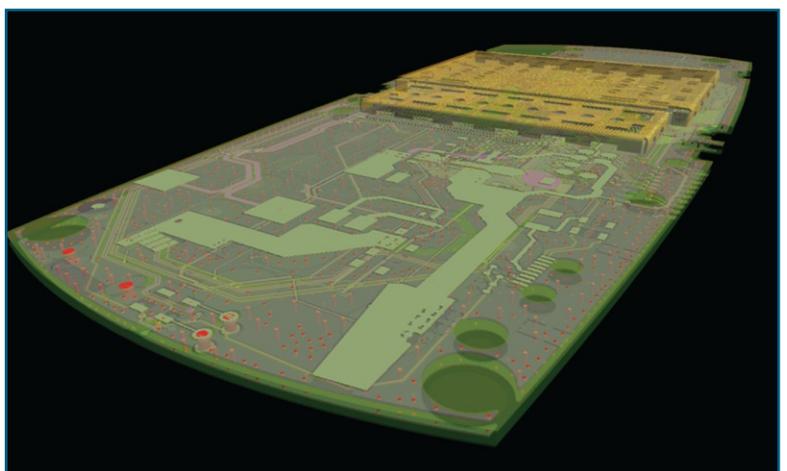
The Benchmark 3 model is a full CAD PCB board.
